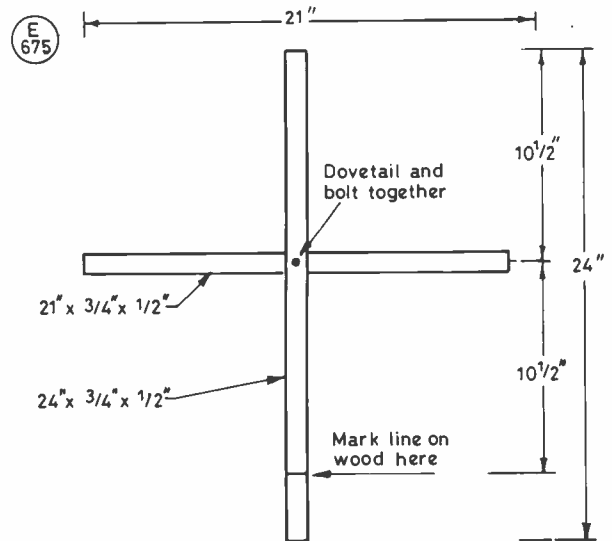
BASIC WOOD FRAME CONSTRUCTION
